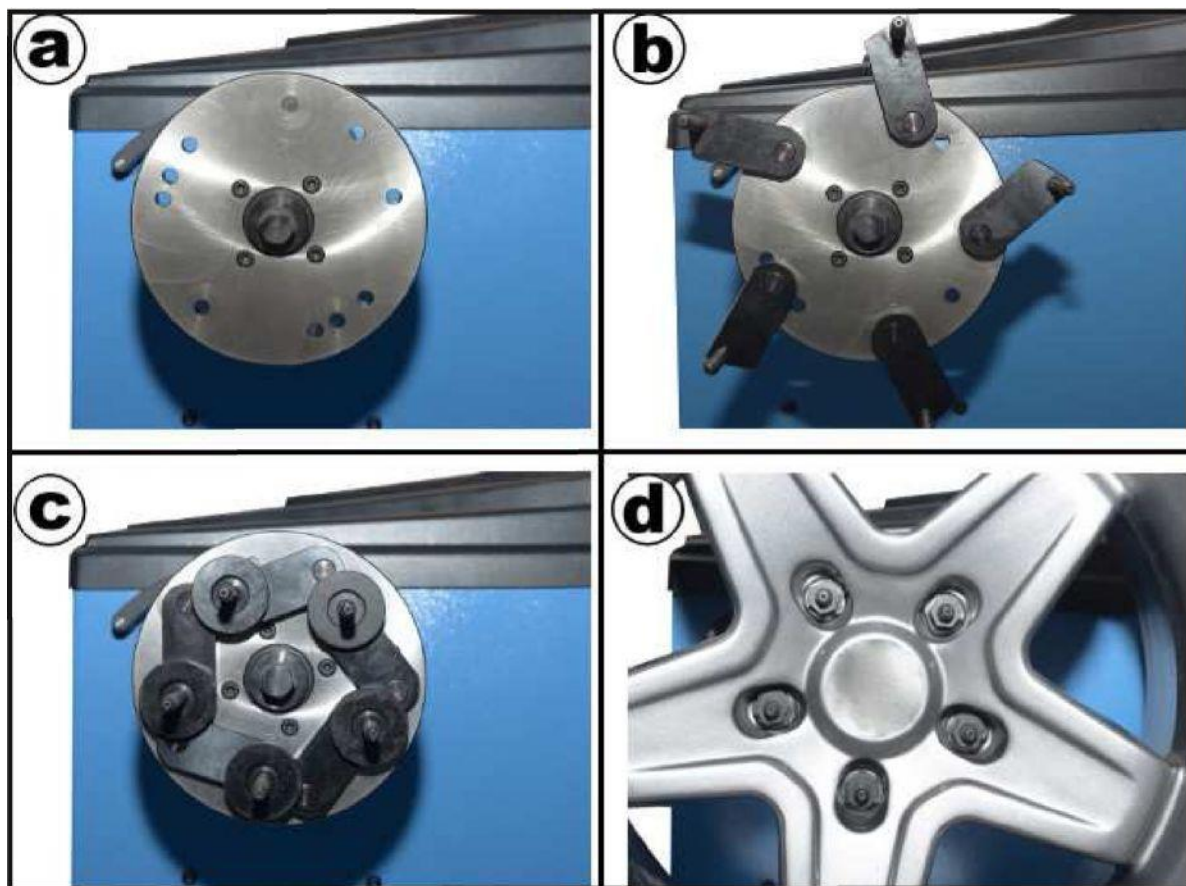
Mounting a wheel without a central hole on the spike holder.
